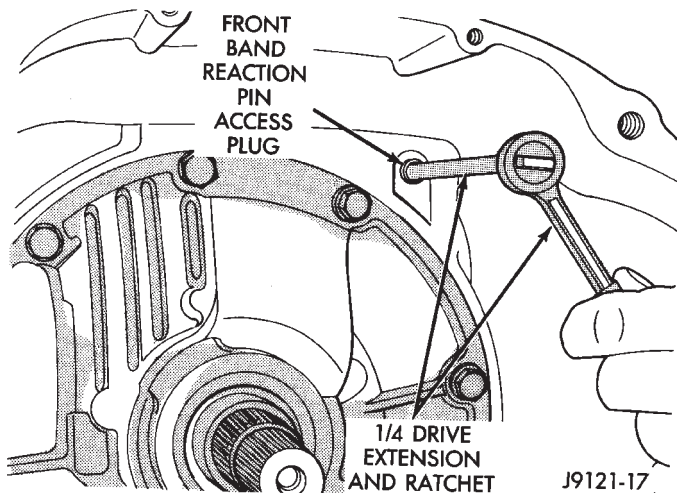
Front Band Lever Pin Access Plug Removal/ Installation
